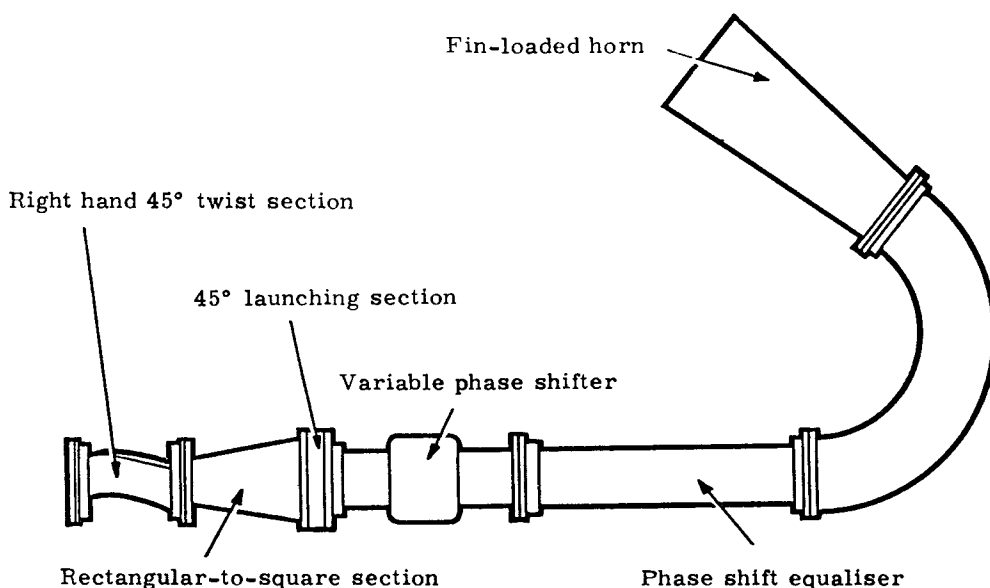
COMPONENT ARRANGEMENT OF BOOM ARM ASSEMBLY
